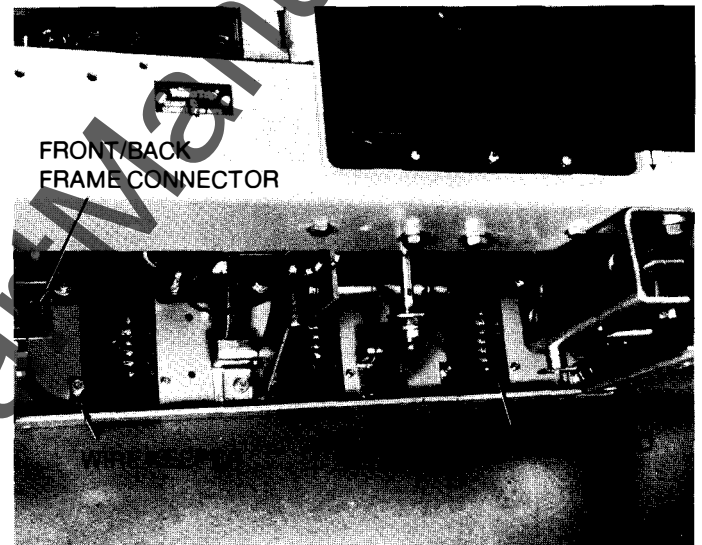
Back frame harness installation — AK/AKR-75/100
